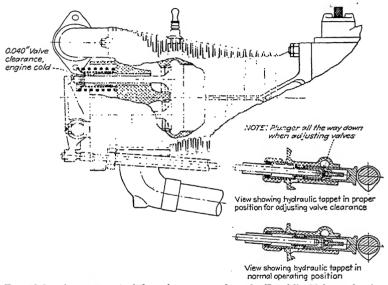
Arrangement of the valve gear used on the Franklin 50-hp. valve-inhead engine.
